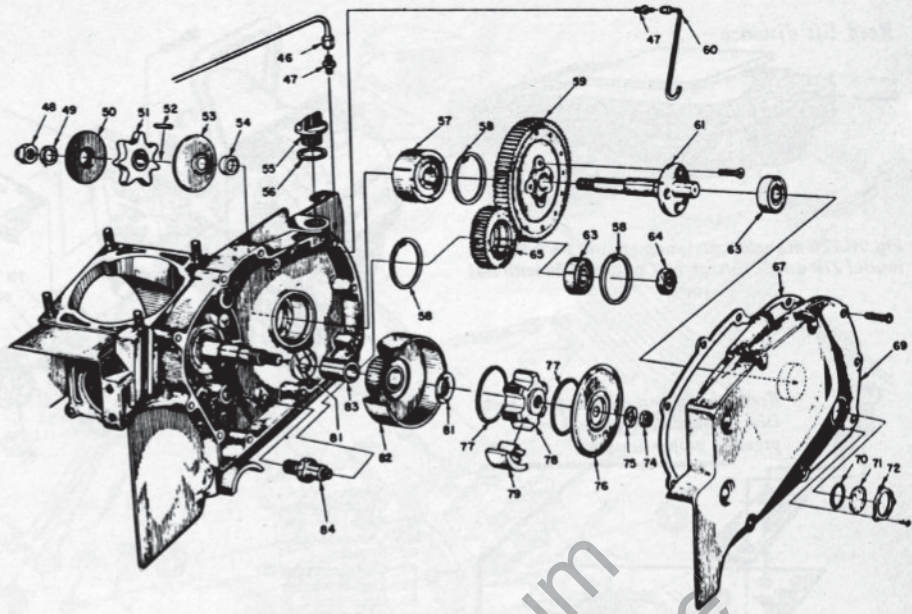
Exploded view of model 995G three-gear transmission. Standard gear ratio is 2.84:1; gears providing 3.57:1 ratio are available. Standard output gear has 71 teeth; optional output gear has 75 teeth. Clutch drum gear has 25 teeth for standard ratio or 21 teeth for optional 3.57:1 ratio.
